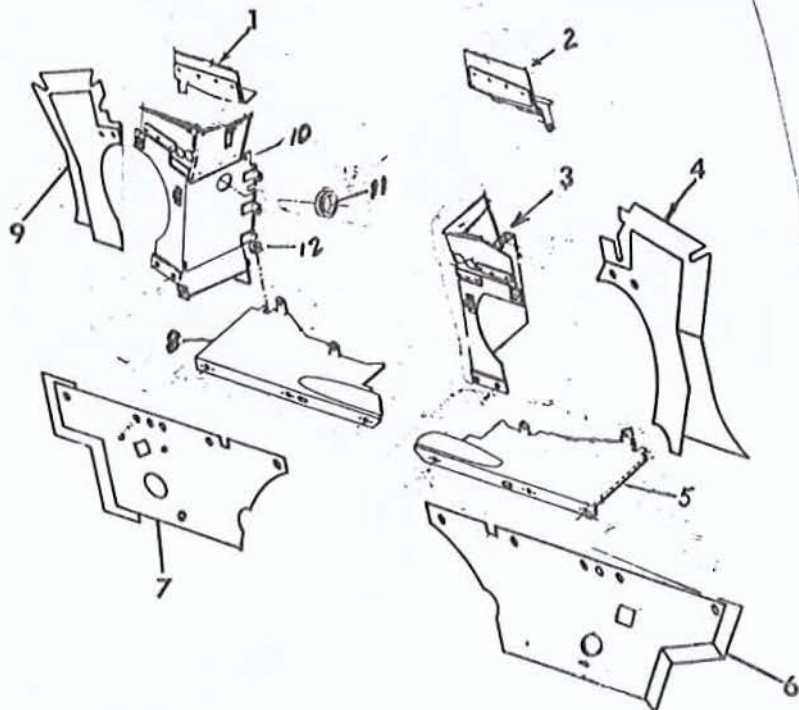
Turbosupercharger and transmission shrouds and plates.
